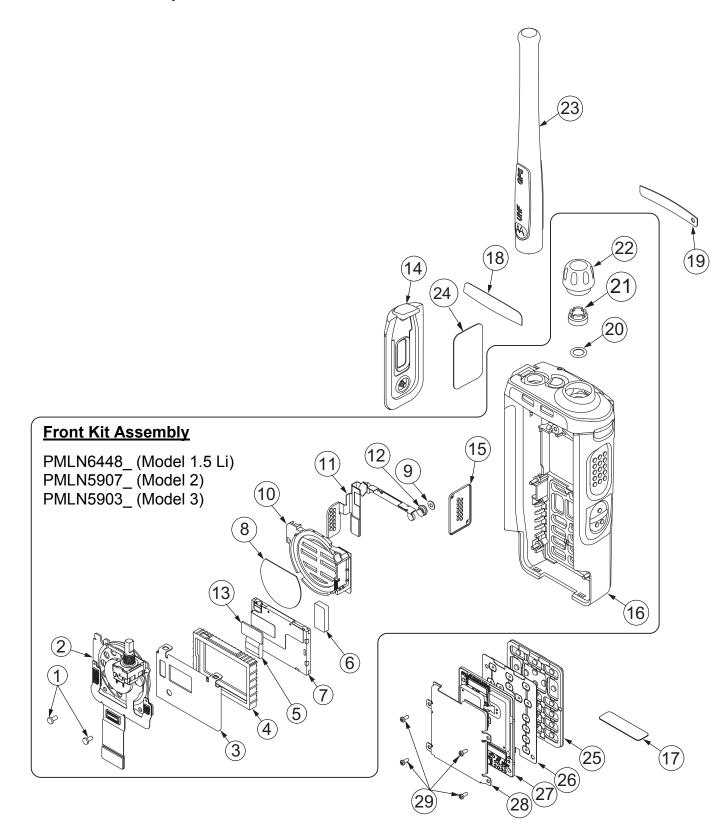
APX 2000/ APX 4000/ APX 4000Li Front Kit Exploded View
